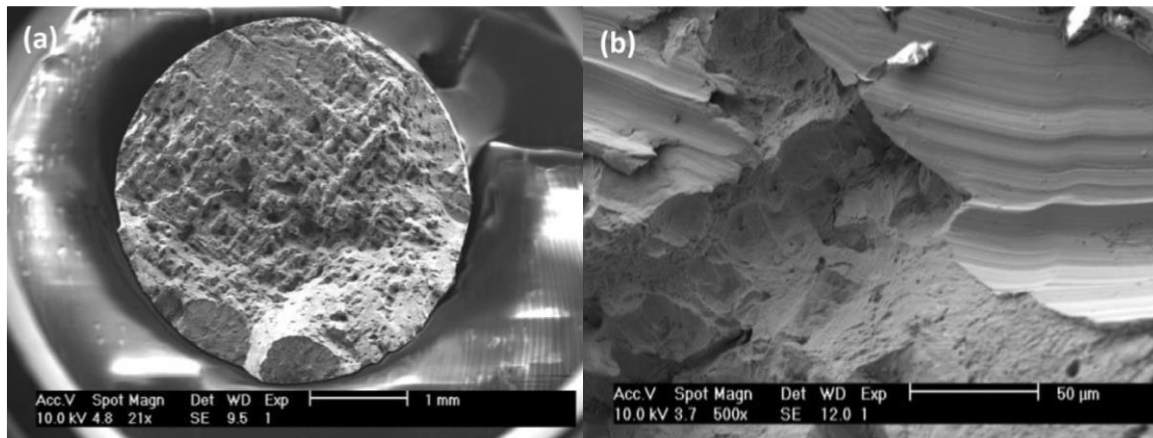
Fracture surfaces resulting from fatigue tests; in a) the fracture surface is revealing the cross-hatch texture done by the laser scanning strategy and in b) it is possible to observe the brittle crack propagation facets.
